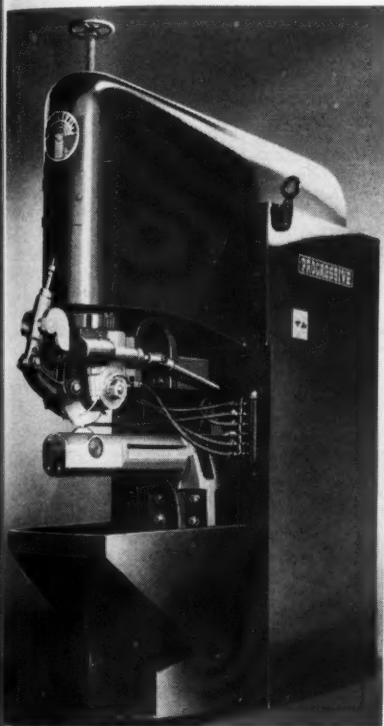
Progressive Medium Duty Universal Type Seam Welder
